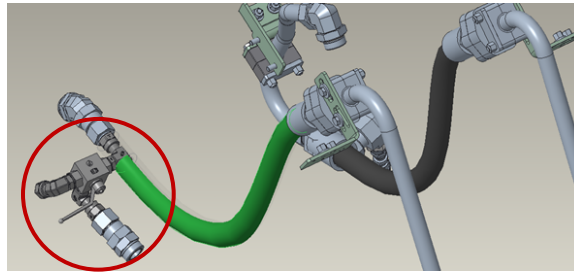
CAD representation of 3-way valve positioned on the bucket hose.
